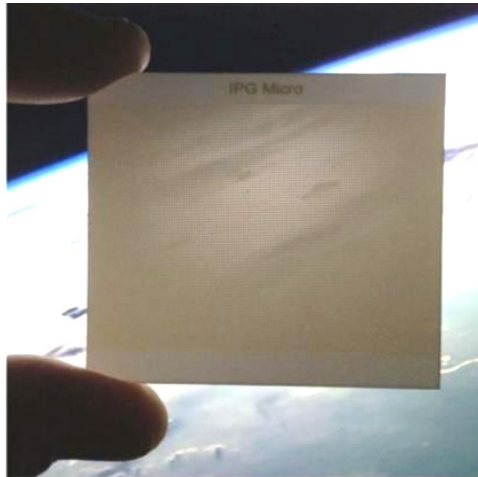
Drilling of 20,000 holes in 50 mm by 50 mm alumina substrate 320 microns thick at >100 holes/sec using the QCW fiber laser. Positional accuracy within ± 5 μm , dimensional accuracy 100 μm entrance, and 70 ± 10 μm exit for 100% of the holes.
